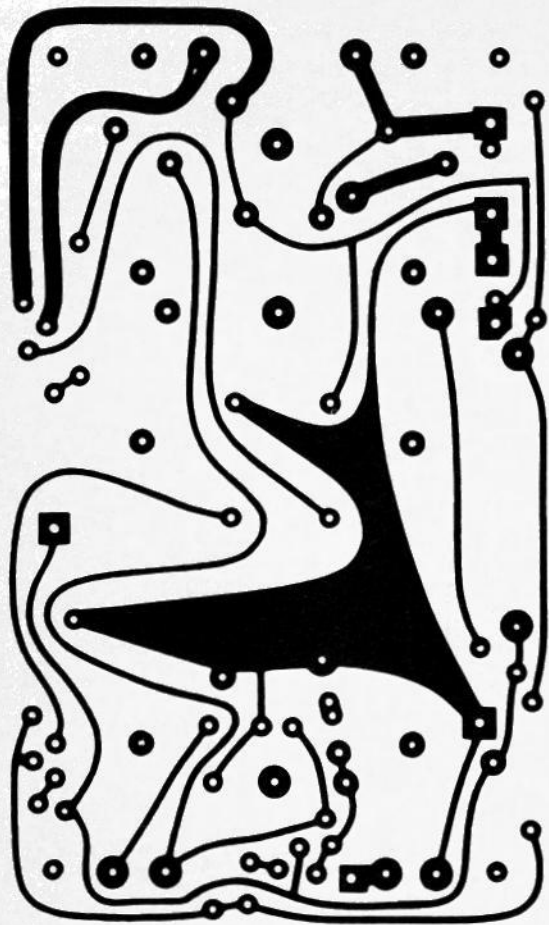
Actual-size etching and drilling guide is shown above left, with component layout guide above right.
